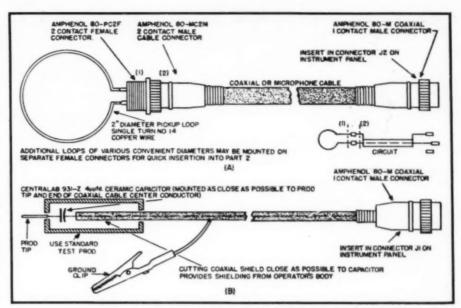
(A) Pickup loop assembly. (B) Probe assembly.
